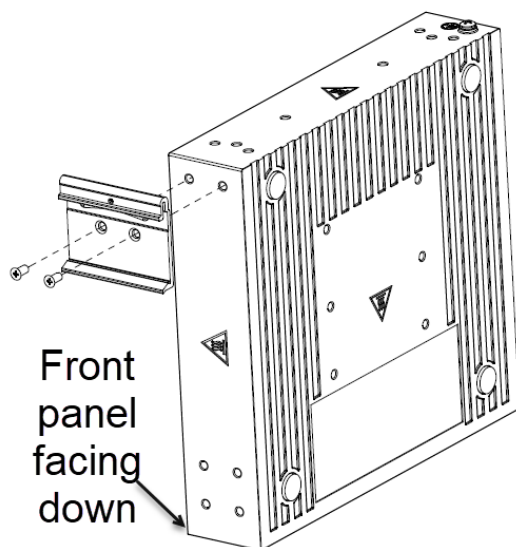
Din Rail Mounting Option 2: Attach the Bracket
